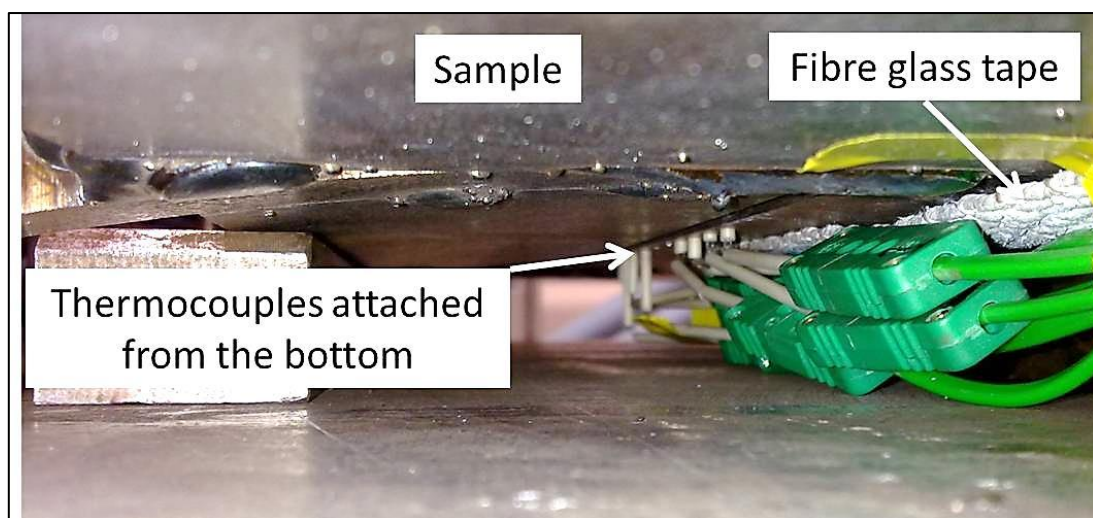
Thermocouples arrangements before submerged arc welding
